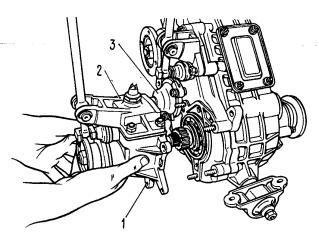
Removing Front Axle Drive Housing: 1 - front axle drive housing; 2 - housing cover; 3 - speedometer drive housing
